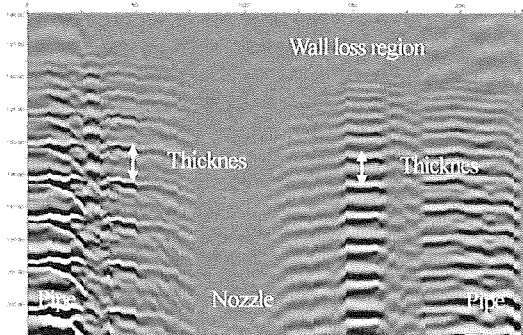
B-scan from pipe specimen with reinforcement plate around the nozzle (after grinding)
